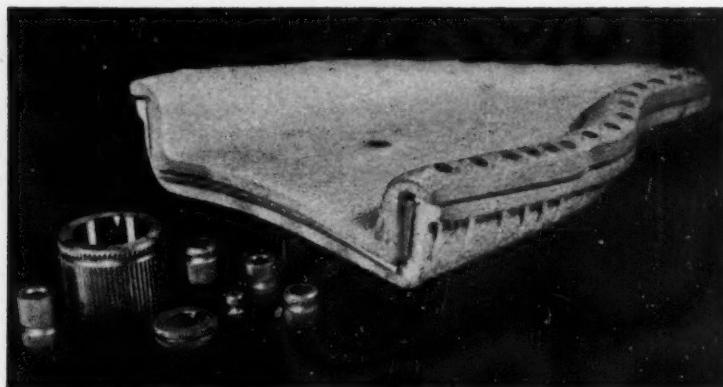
Glass Fibre Jig Incorporating Talbot Polygrip Drill Bushes
